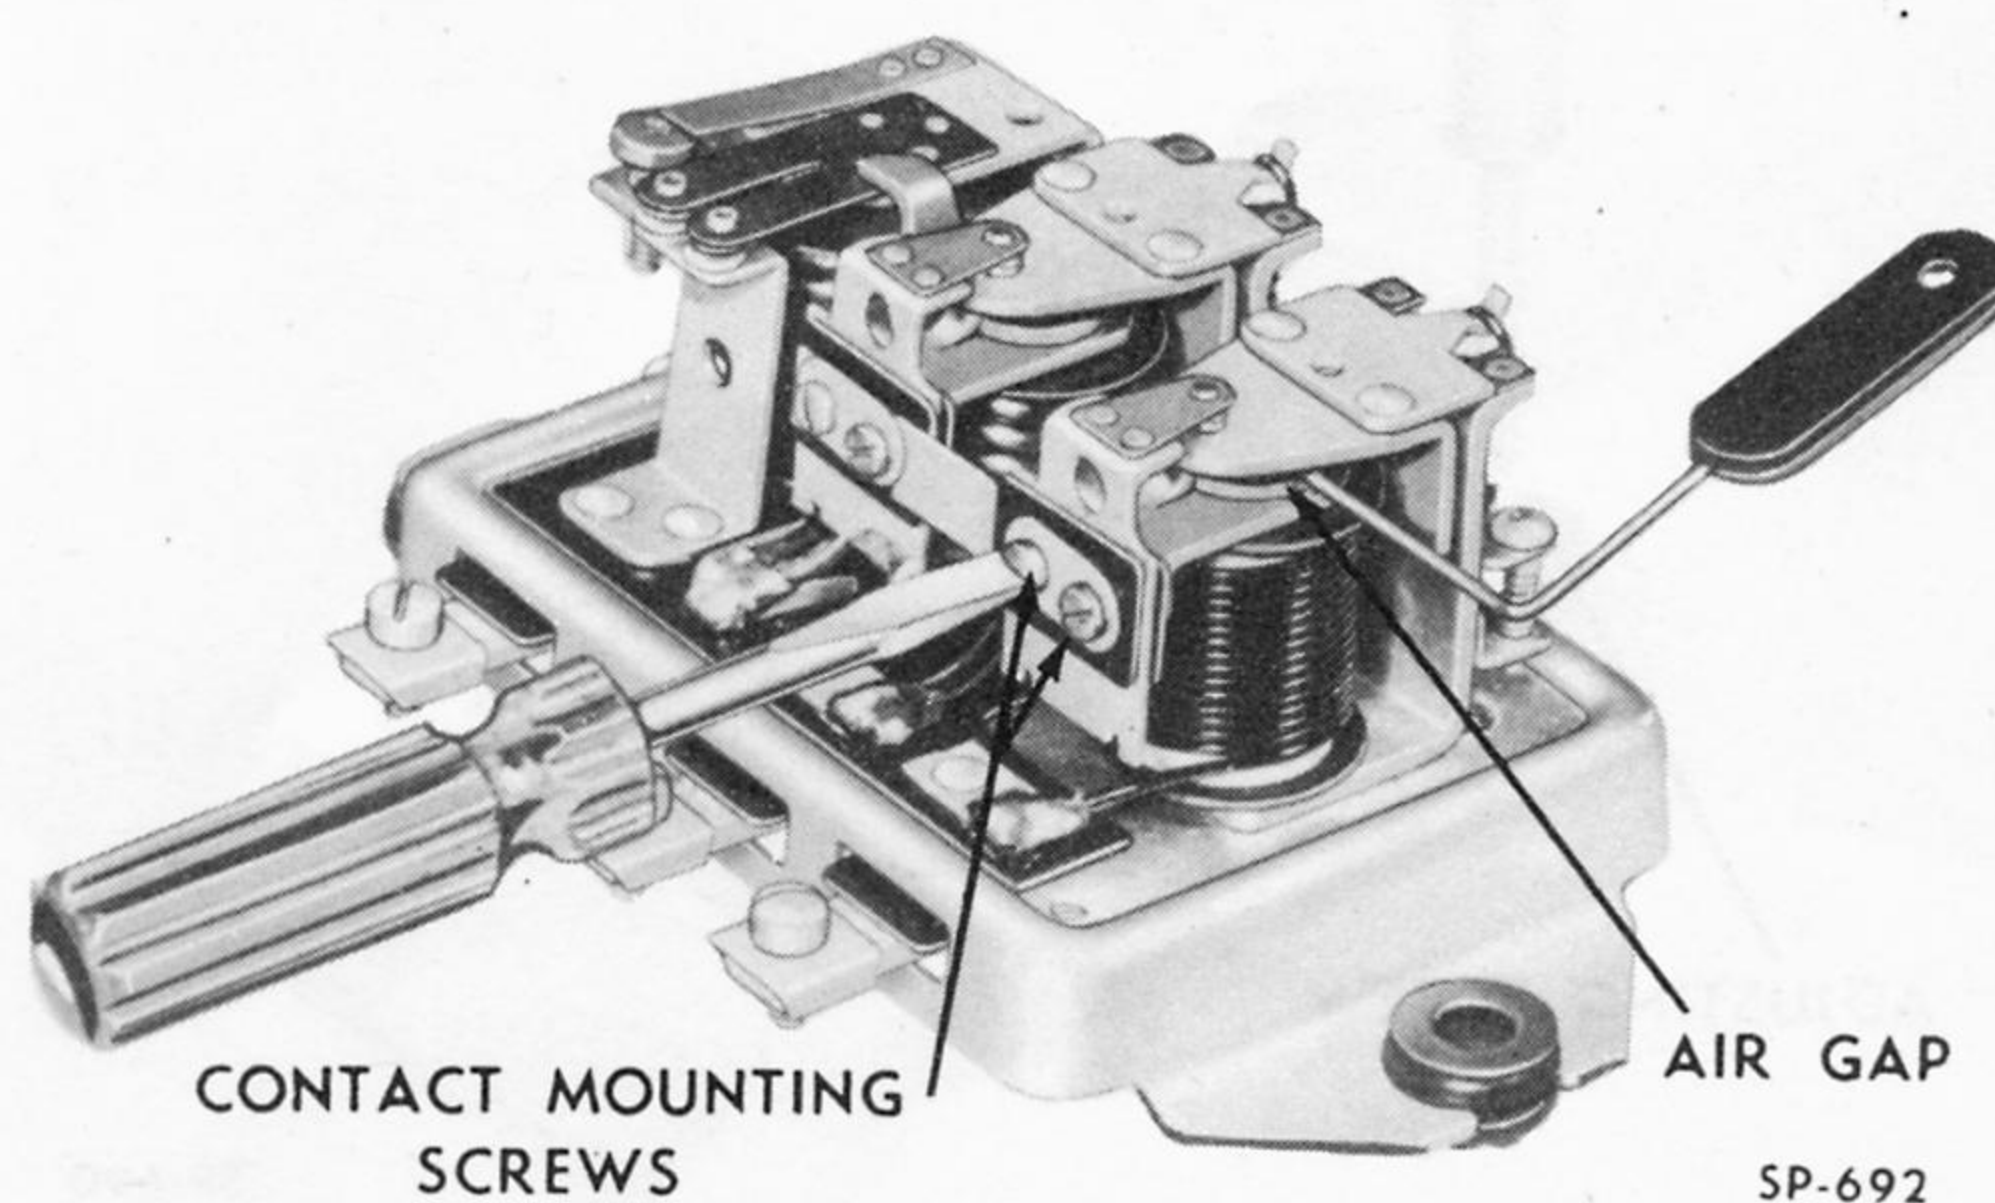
Adjusting Kaiser Voltage Regulator Air Gap
